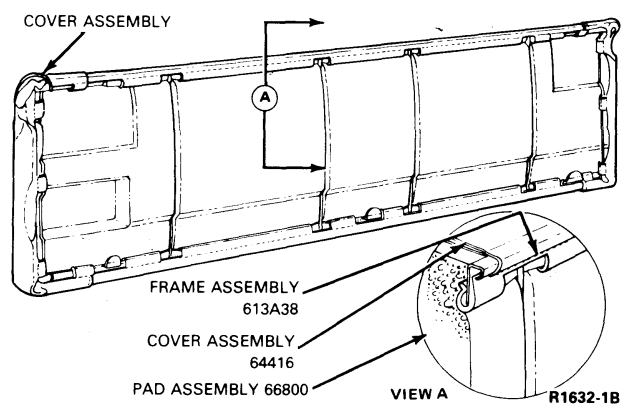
Rear Seat Back Cover Installation—F-Series Super Cab
